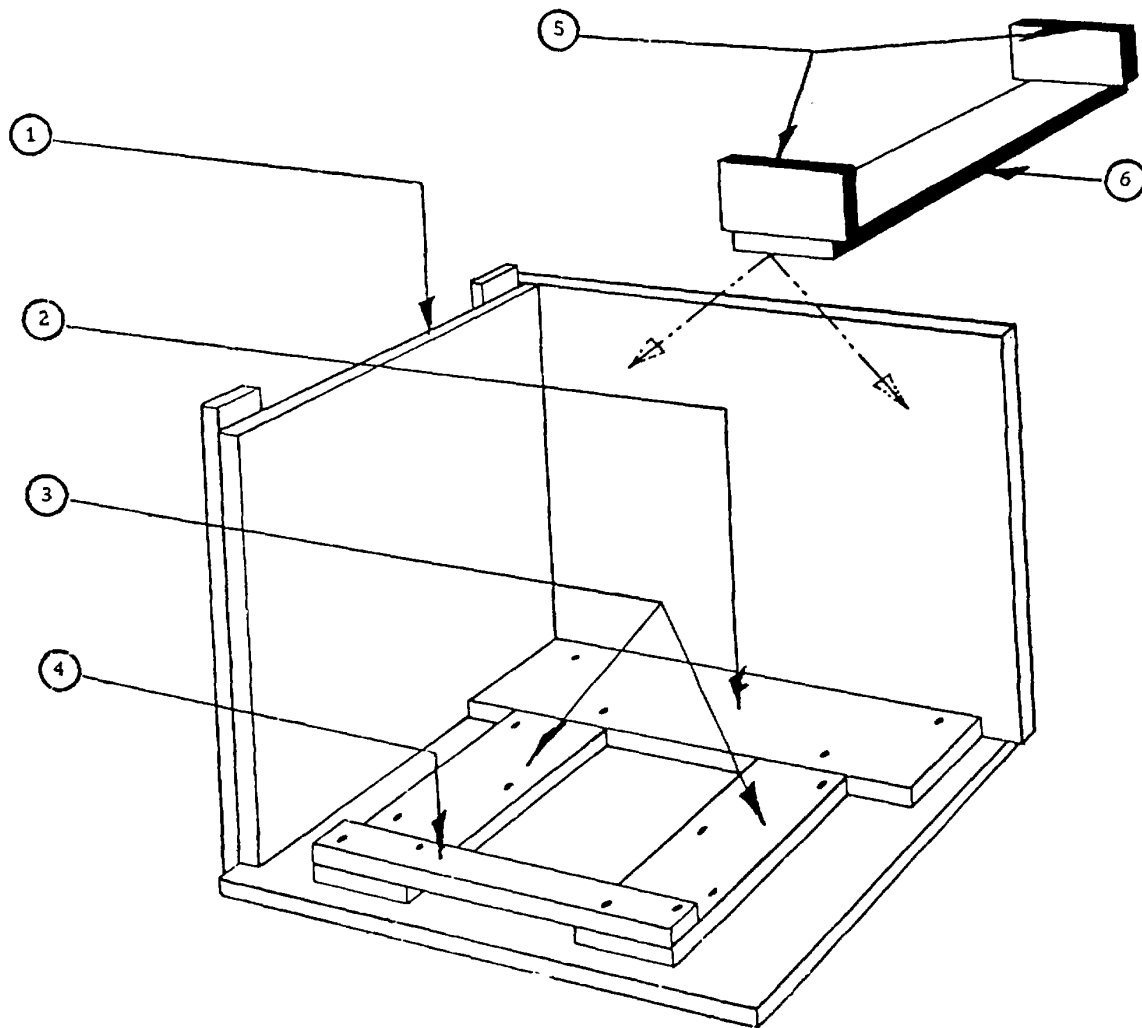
Loading, Blocking, Bracing, and Anchoring.
